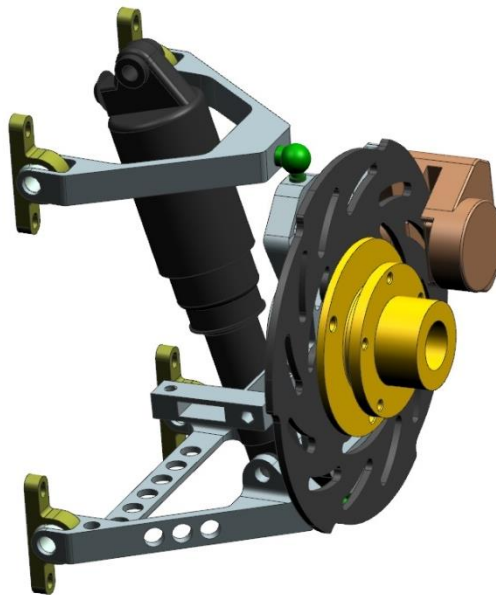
Front suspension with all parts (wishbones, steering knuckle, steering arm, wheel hub, brake disc, brake calliper, shock absorber)
